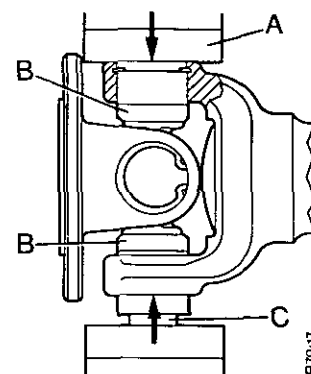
INSTALLING BEARING CUPS IN A UNIVERSAL JOINT
